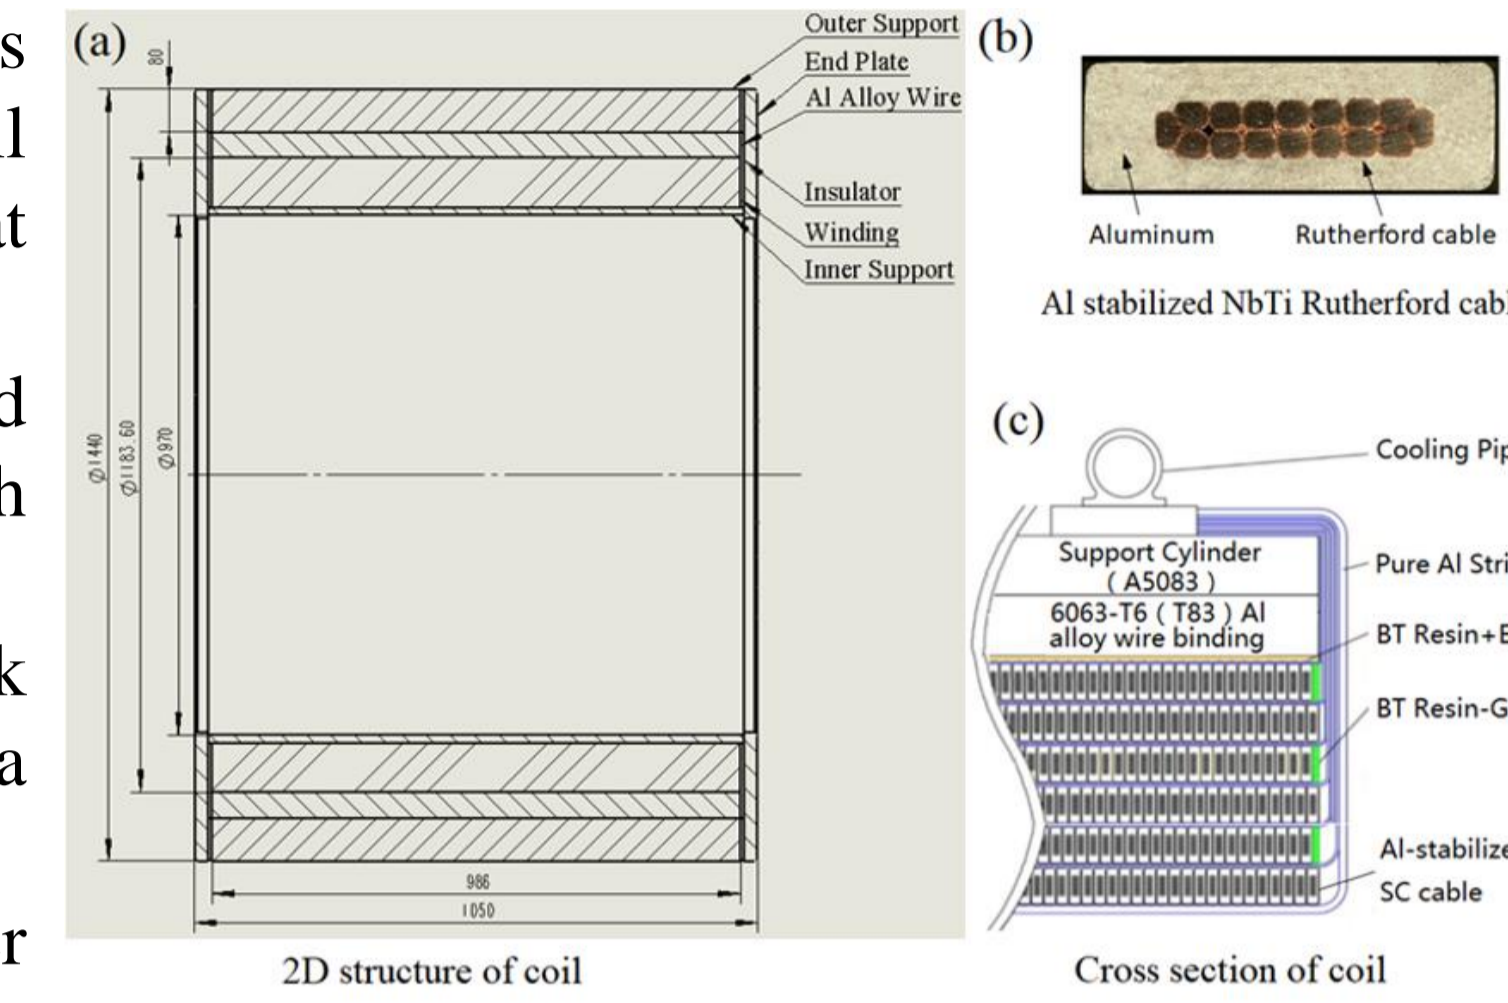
(a) Dimensions of CS1. (b) Cross section of the Al stabilized NbTi Rutherford cable. (c) Cross section of the coil.
